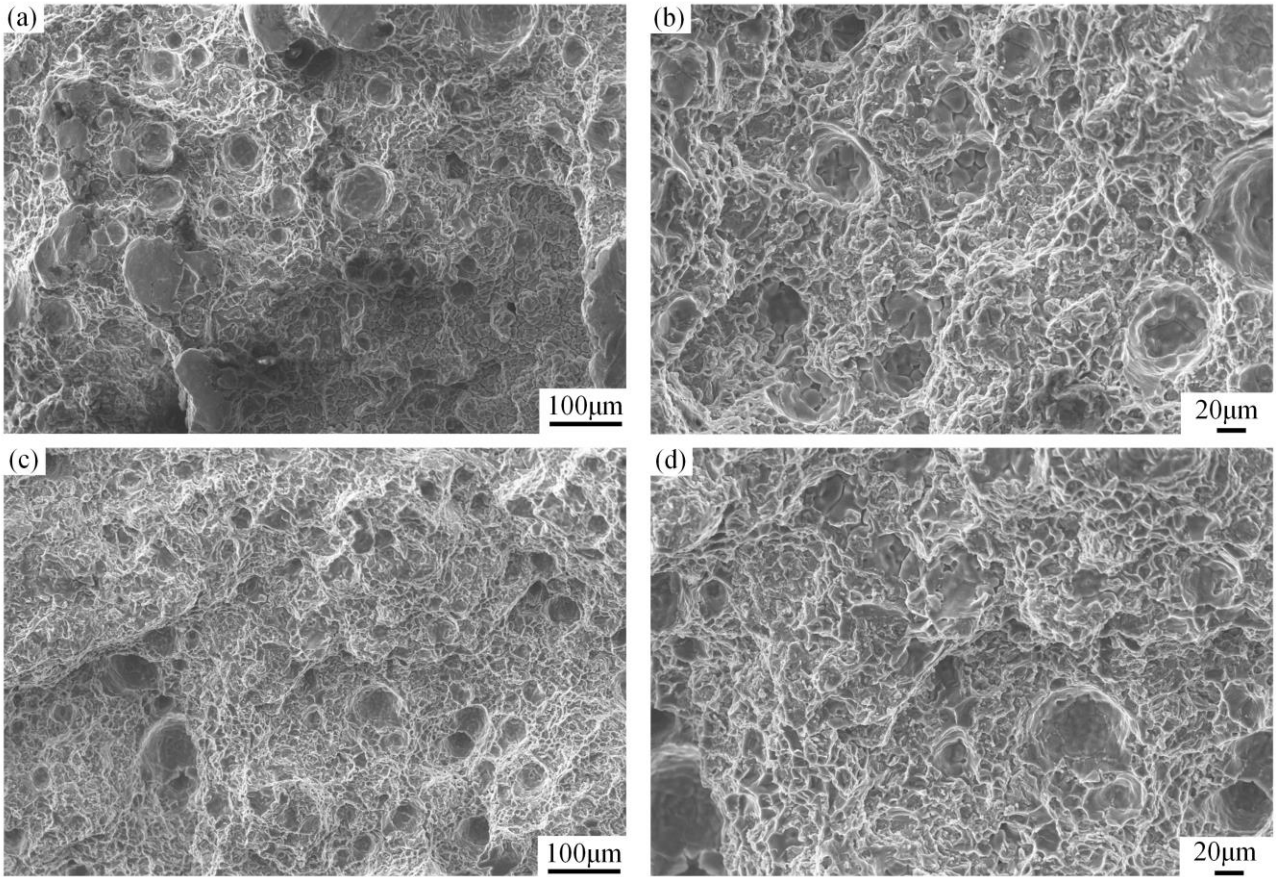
Fracture photos of tensile samples: (a) and (b) photos of as-built strut samples, (c) and (d) photos of machined strut samples
